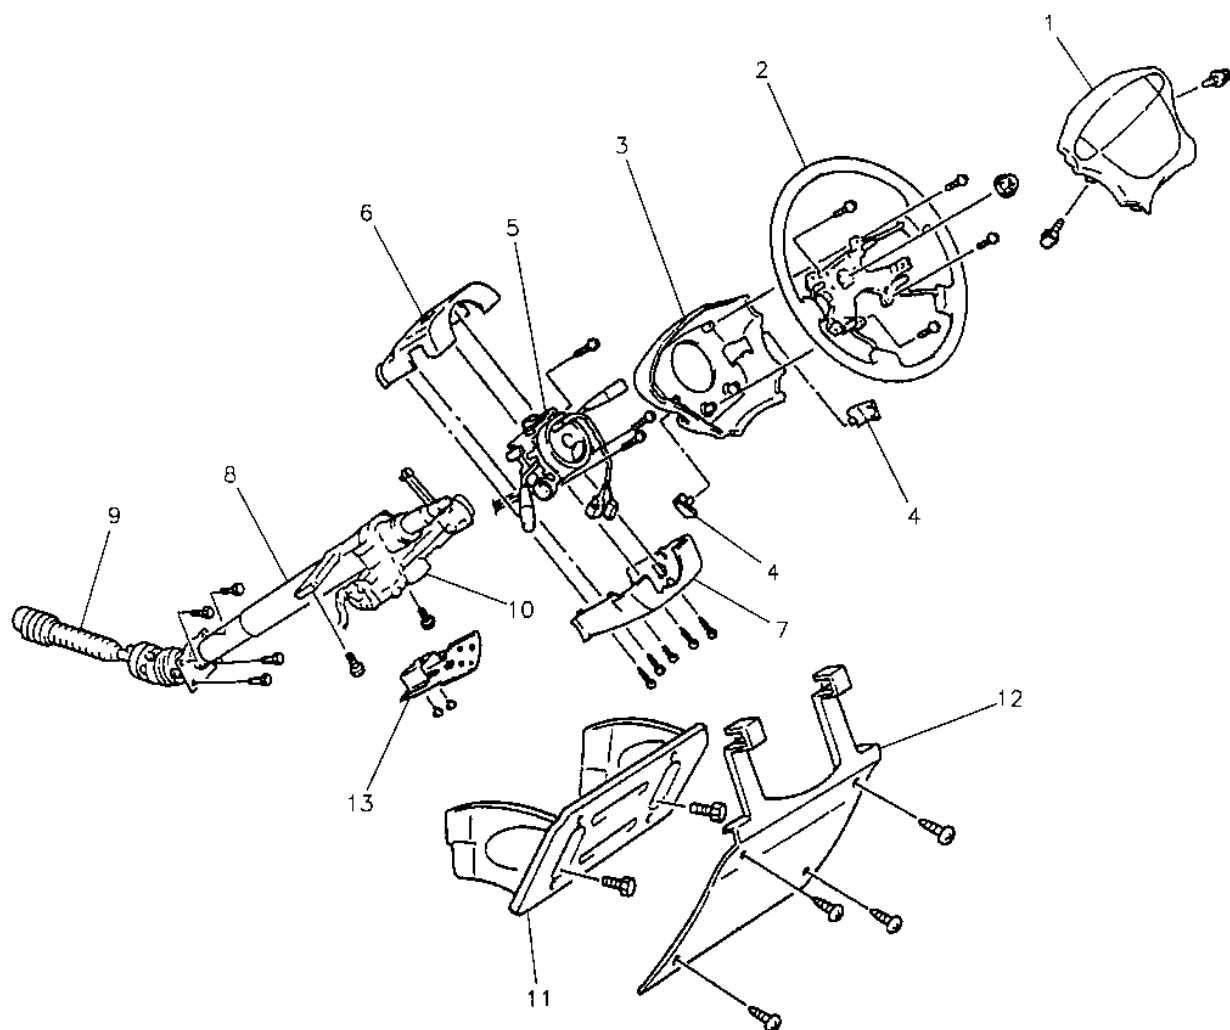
Drivers Inflator Module Torx® Head screws—(Location)
